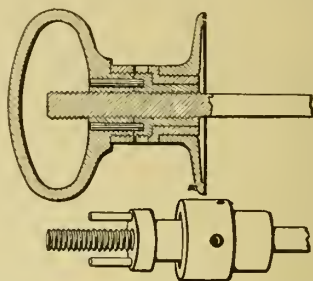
Knob-Holding Device, Adjusted by a Thread.
